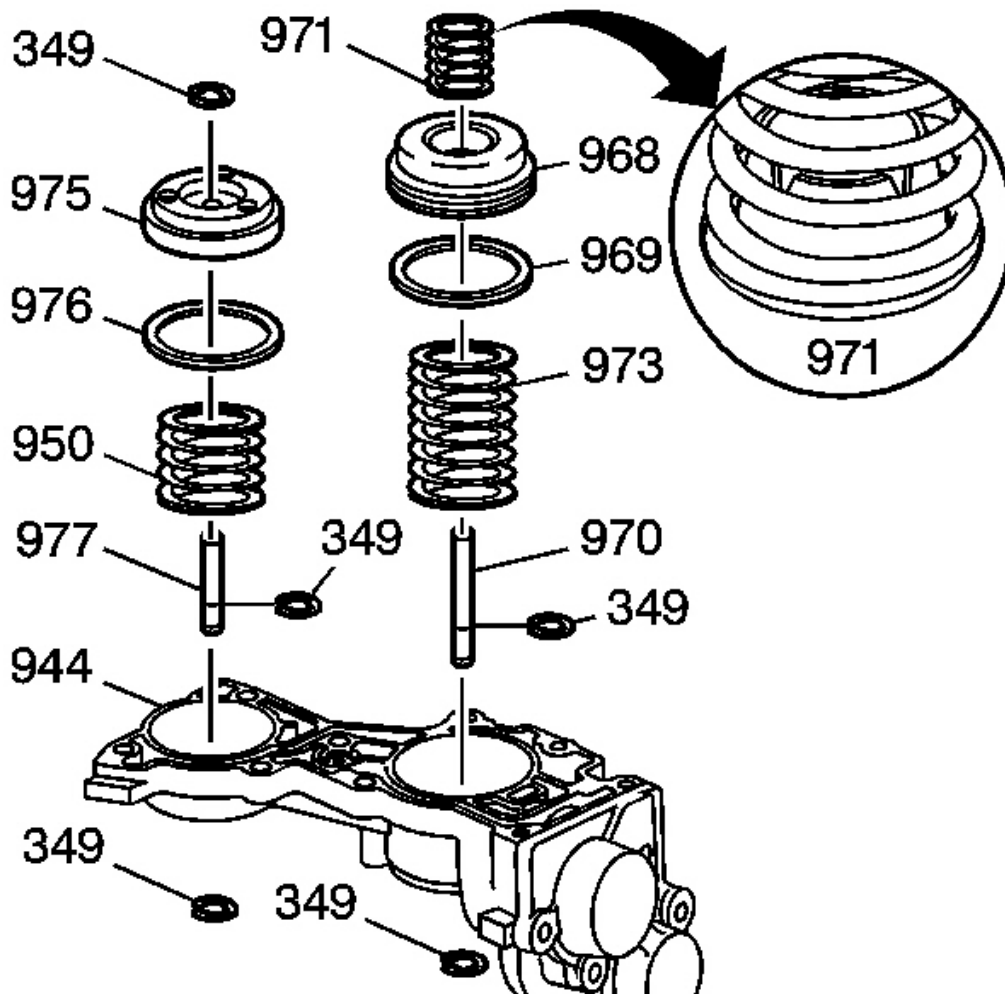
Identifying 1-2 Accumulator Assembly & 3-4 Accumulator Assembly
